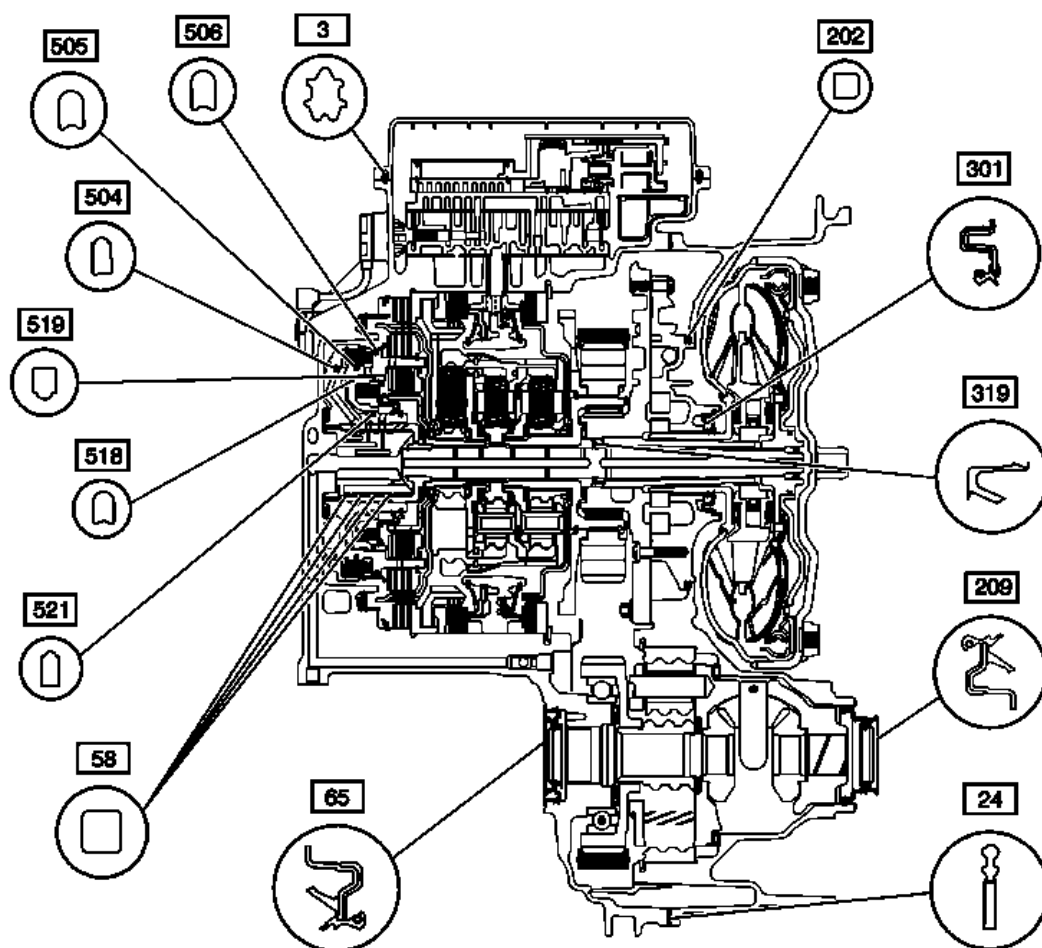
Automatic Trans Seal Kit (Gen 1) 24251353 (1 Of 2)
